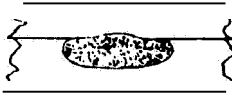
COMMON DEFECTS IN RESISTANCE-SPOT AND SEAM WELDS AND THEIR CAUSES (Ref. 85)
